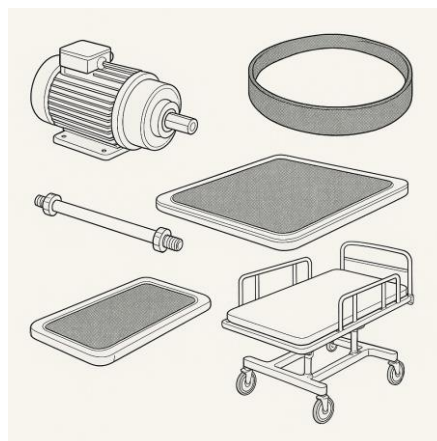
This image is a technical drawing of the bed's components, drawn individually. By properly connecting these components, the final bed structure can be achieved.
